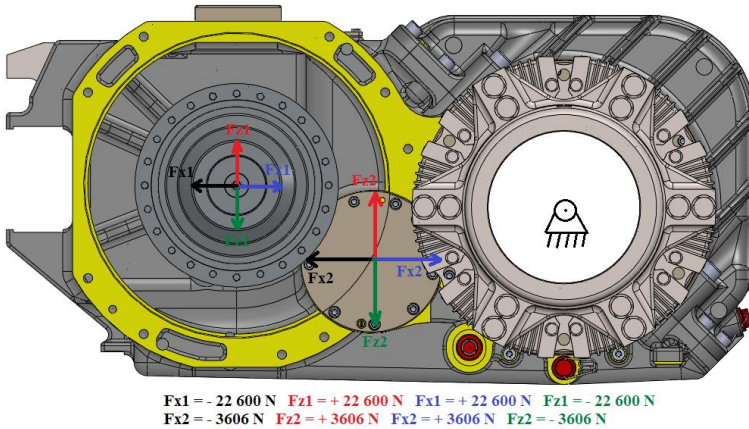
Inertial load of the rotor on the 1st bearing.
